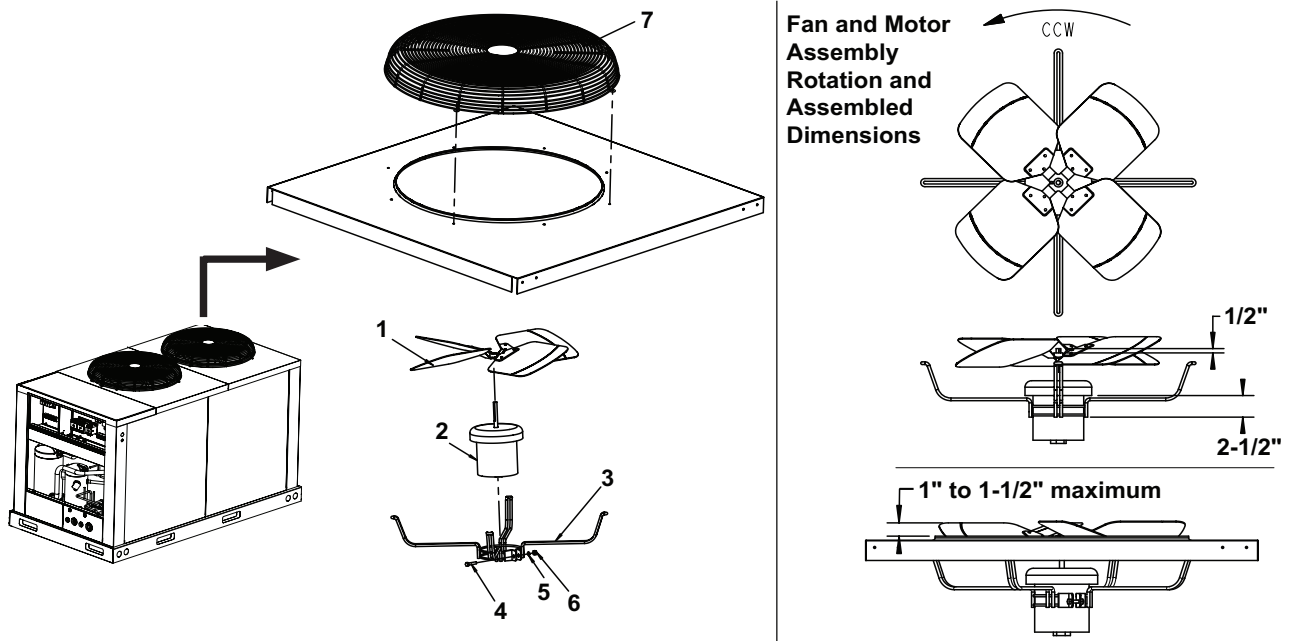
Condenser Fan and Motor Assembly (Refer to Table 7)
